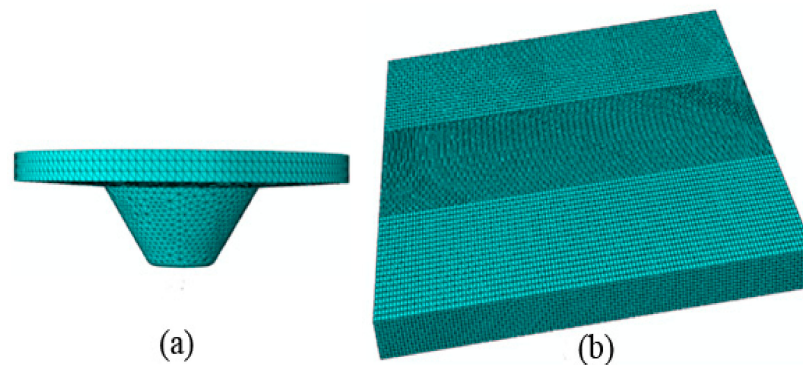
Finite element mesh for tool (a) and workpiece (b).
